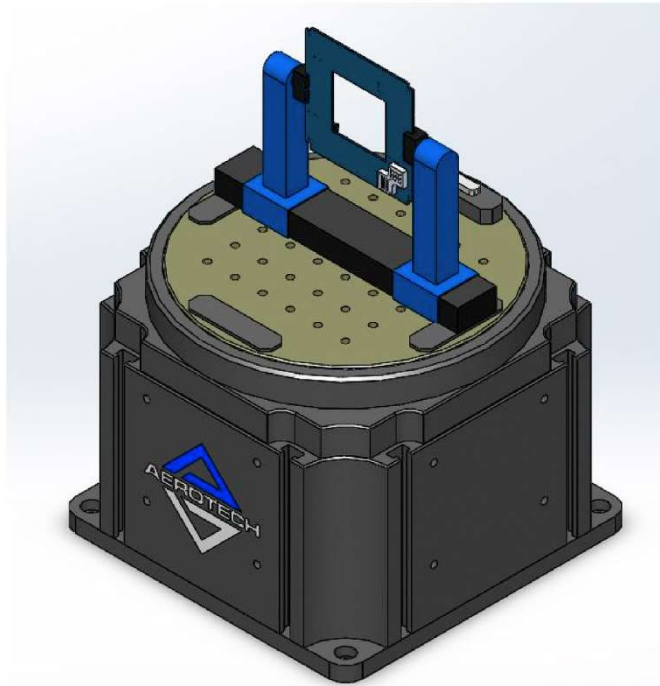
CAD Model showing the mounting of the PCB on the turntable (isometric).
